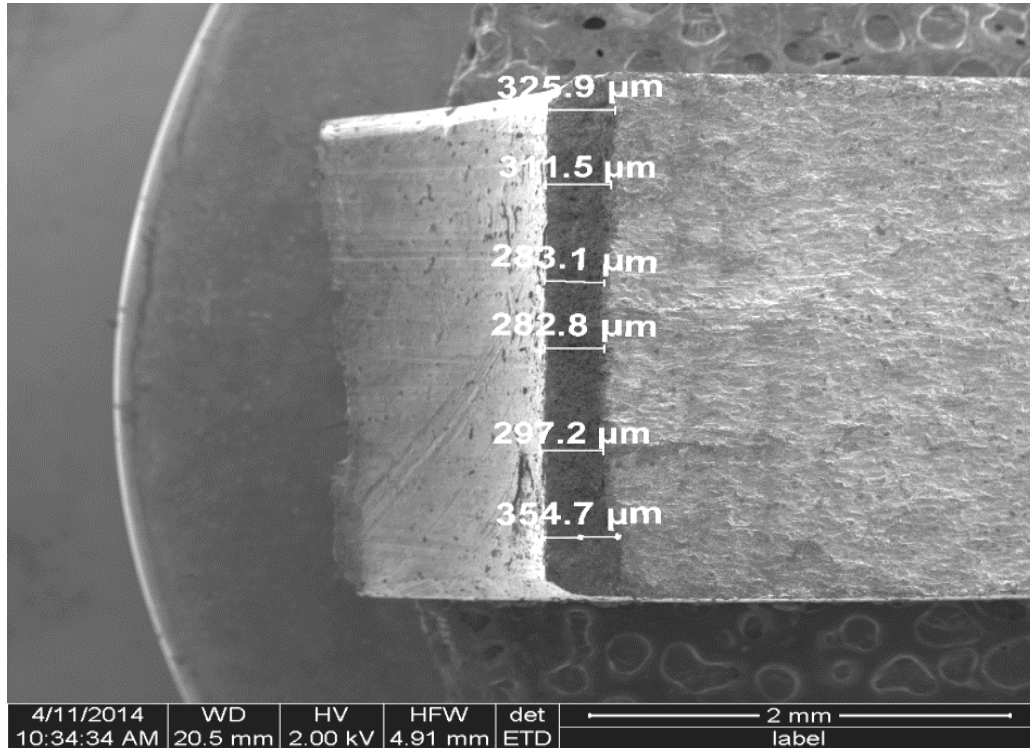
Top view of the through pit and fracture surface.
